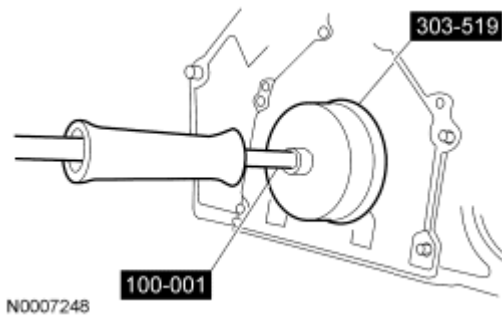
Removing Crankshaft Rear Seal Using Special Tools
